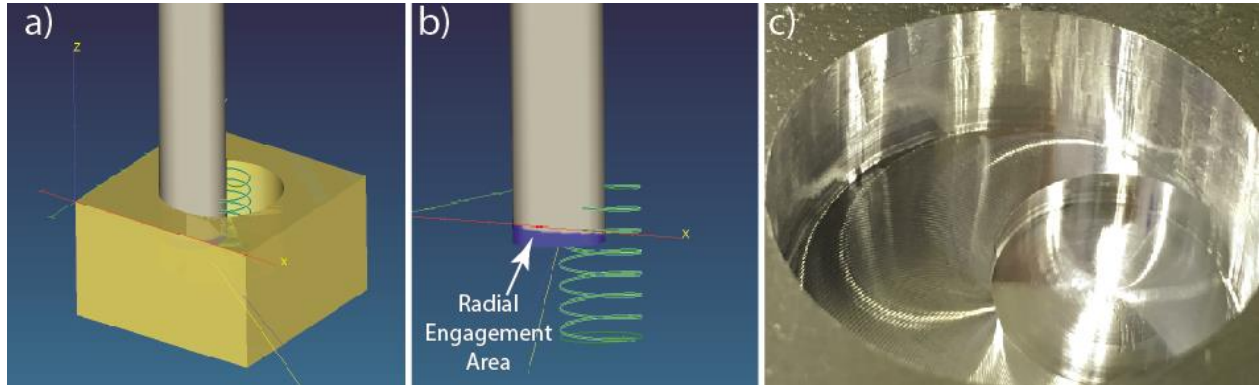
a) Virtual orbital drilling on ,MACHPRO , b) Radial engagement mapped on the end mill, c) Workpiece after end mill leaves the workpiece in zone2
